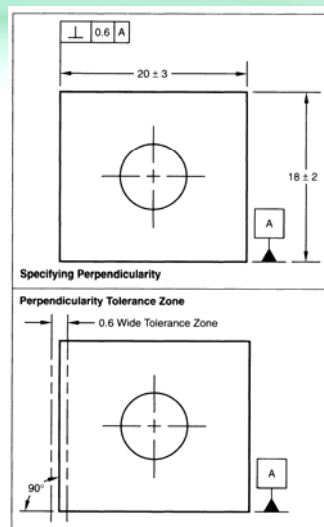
Perpendicularity tolerance applied to a surface
